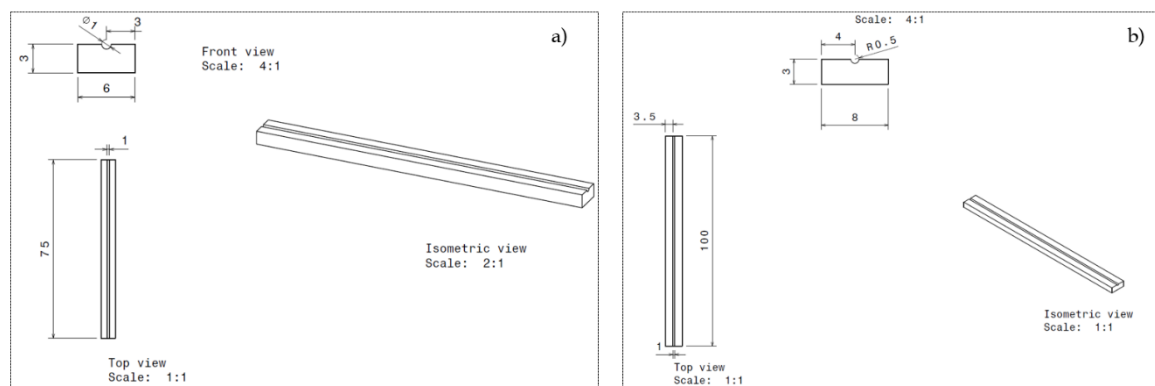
Drawings of the slots components for a) moving element and b) fixed block element.
